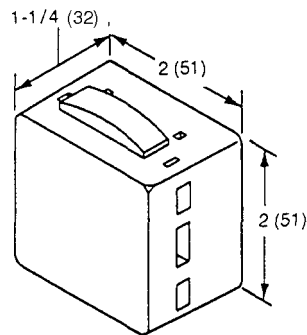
Overall Dimensions for TS-81031 Mullion Cover.
